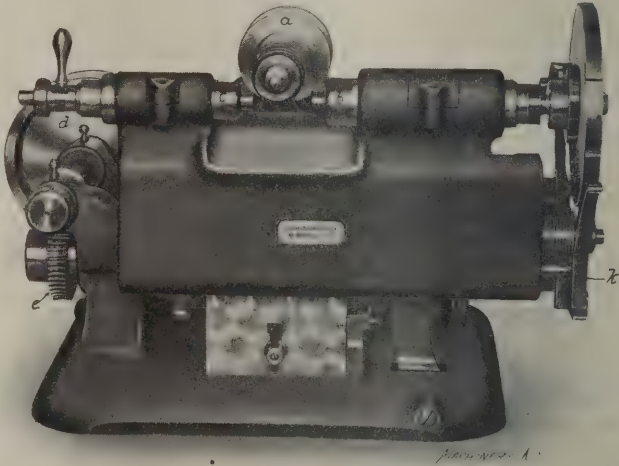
Front View of Automatic Clock and Watch Pinion Cutter.
